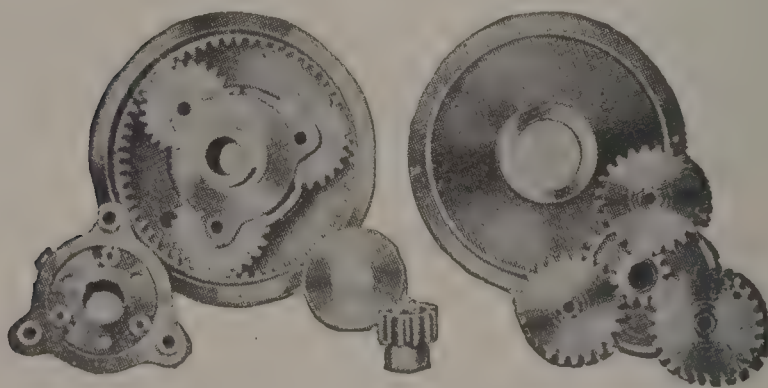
Exploded view of Wagner gear connecting dynamotor to the engine
